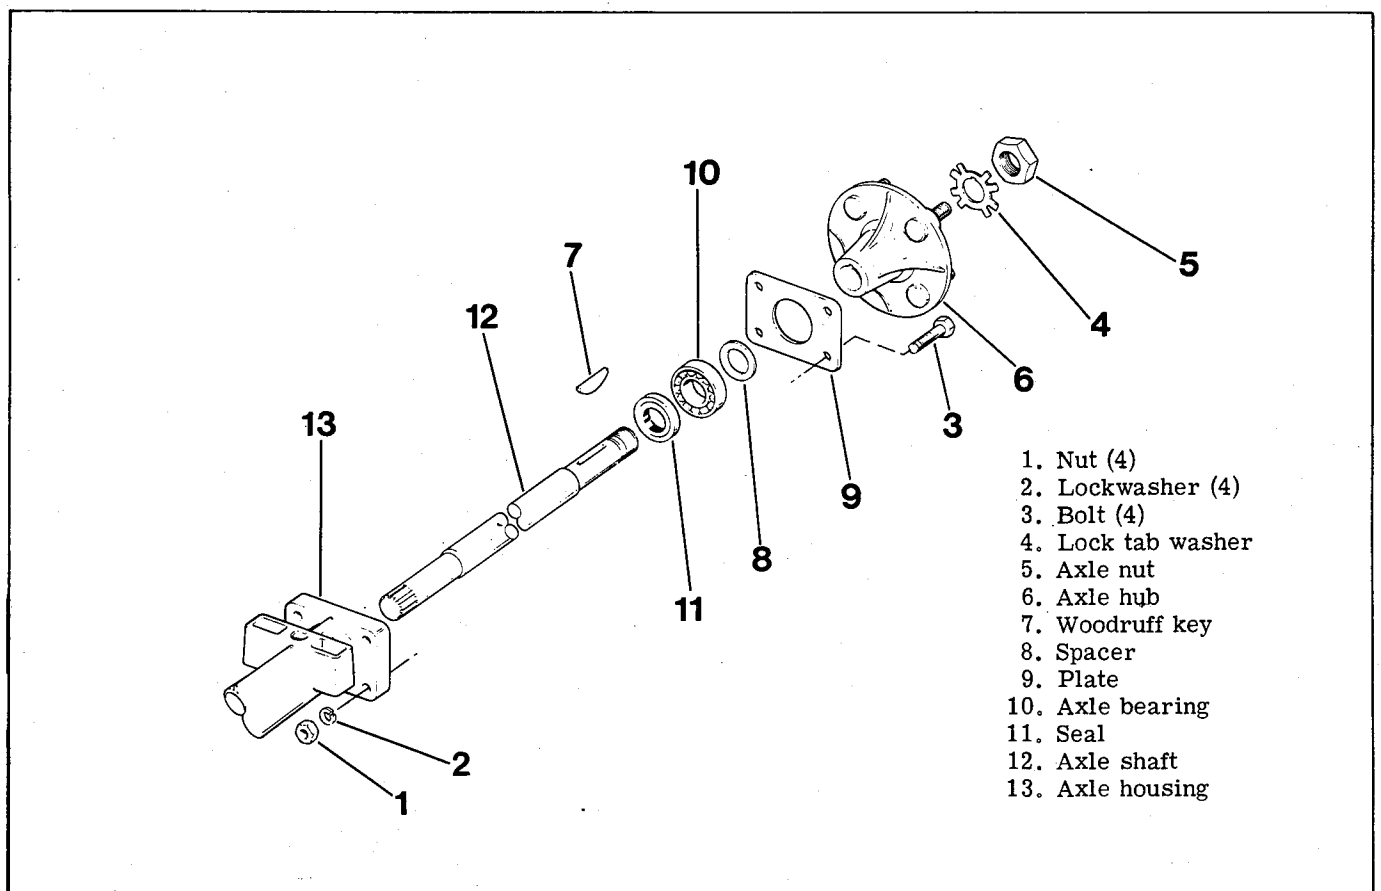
Rear Axle - Exploded View - 1977 and later Model DE-3
